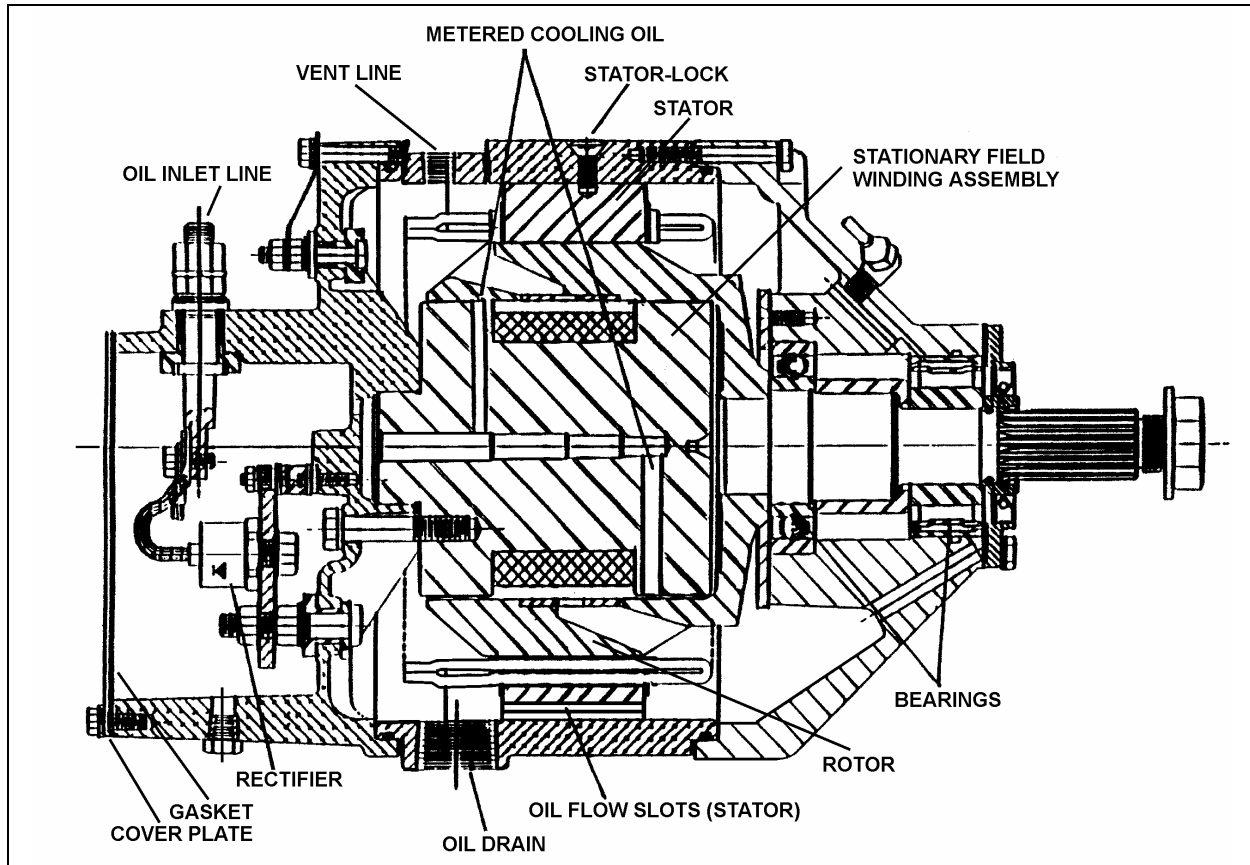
50DN DELCO ALTERNATOR SECTIONAL VIEW
